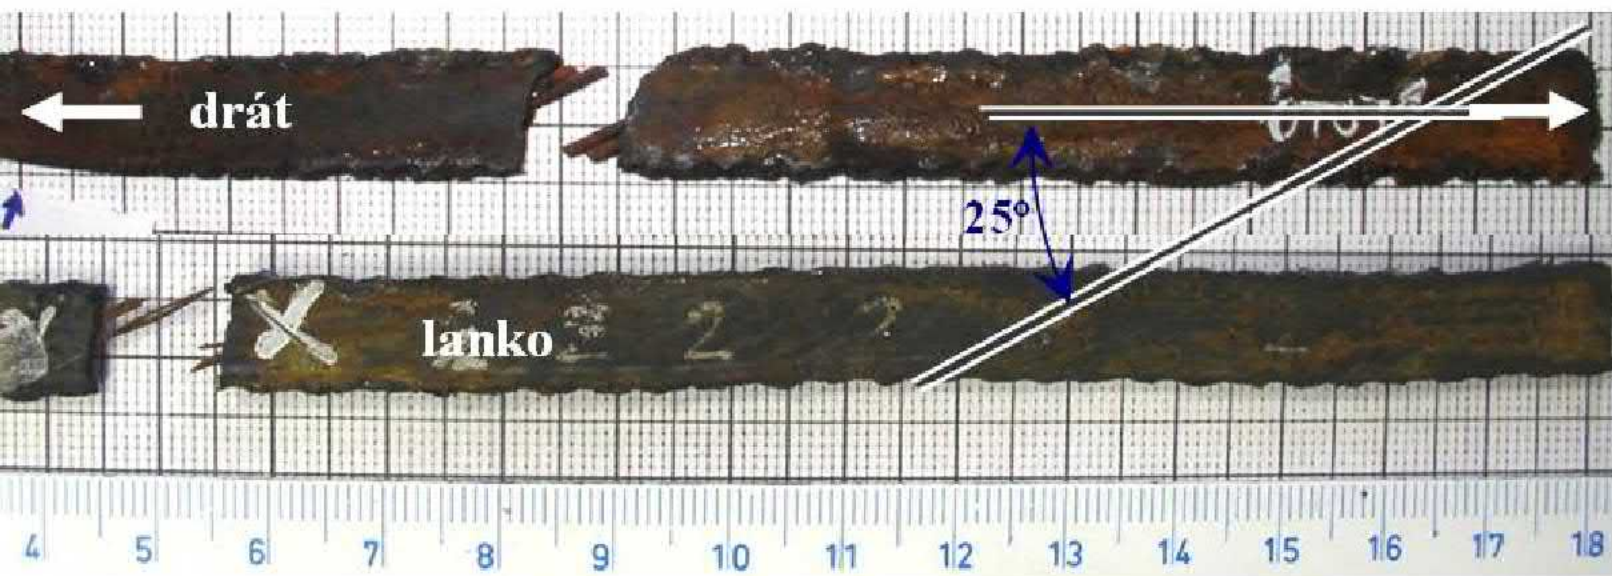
Specimens of steel-cord belt after failure with details of fracture area.
